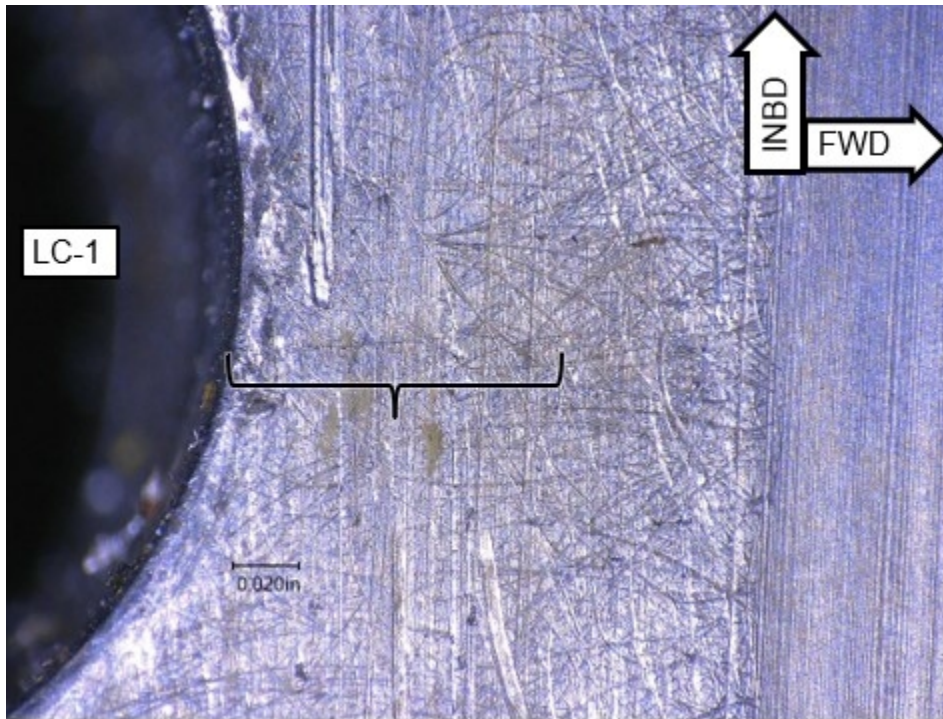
Magnified image showing a faintly visible crack feature extending from the forward side of attachment bolt hole LC-1
